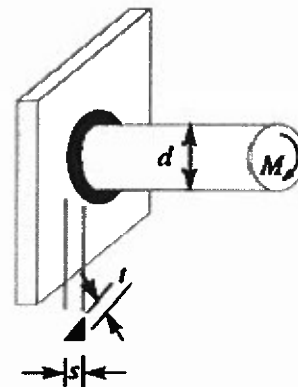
Circular fillet weld subjected to Bending moment.
